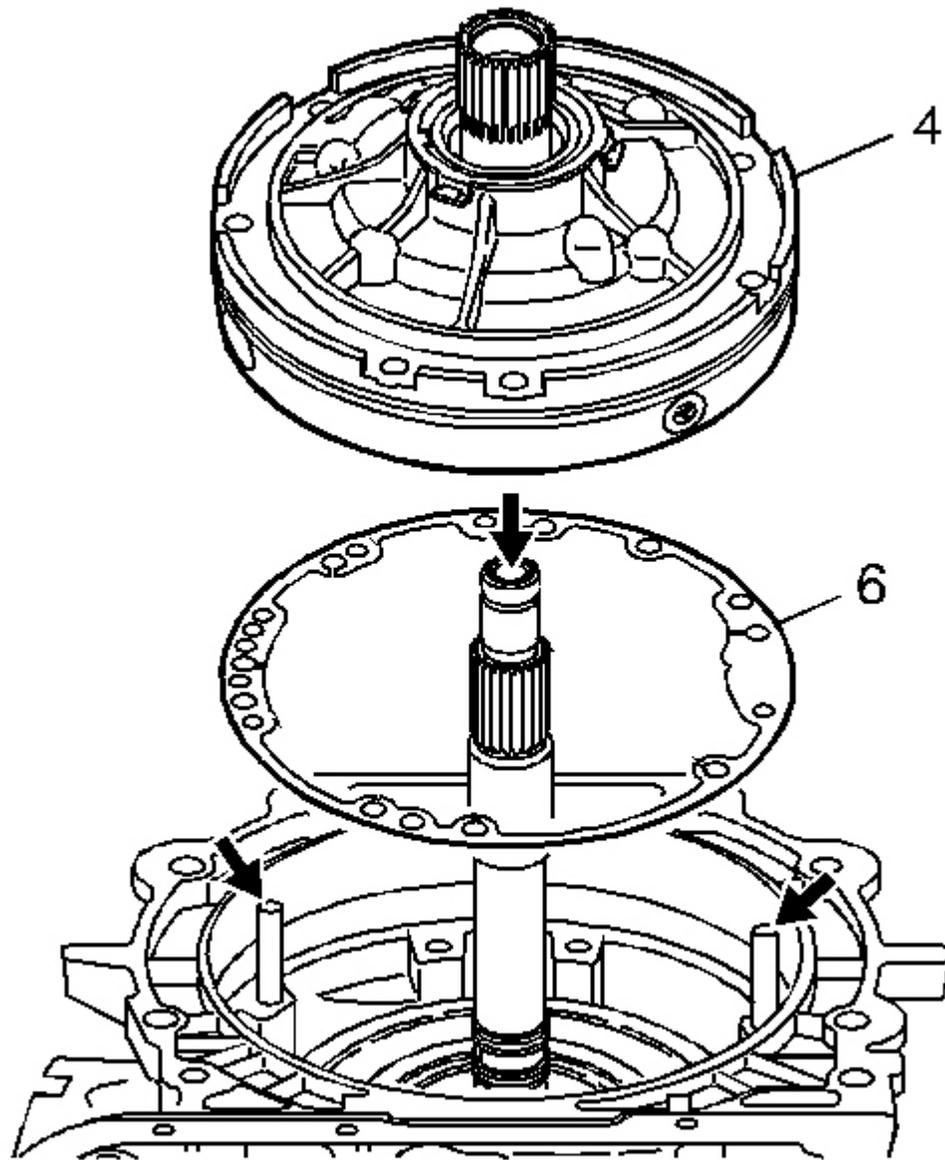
Installing Cover To Case Gasket & Oil Pump Assembly
